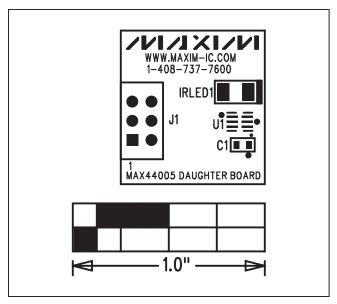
MAX44005 Daughter Board Component Placement Guide—Component Side
